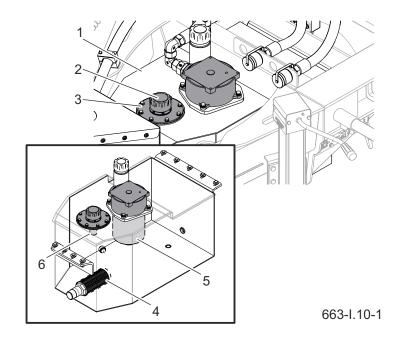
Oil filter replacement (1) oil tank (2) filler plug with filter (3) tank inlet cover (4) oil suction filter (5) oil filter (6) strainer
